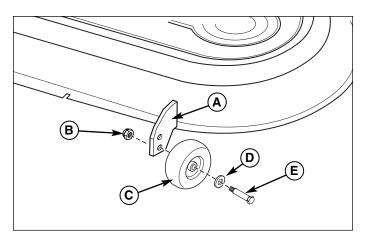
Fixed Bracket Gauge Wheel Adjustment
